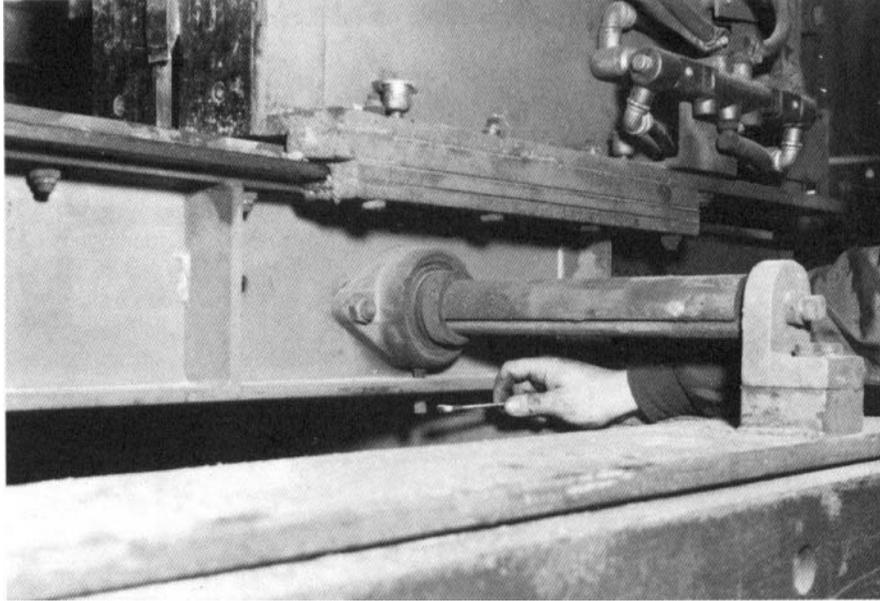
Adjust the set shaft for a proper mesh between the rack and pinion gear by raising the bearing with the set screw on the underneath side, Bolts that hold these bearings in place must be loosened before making the adjustment and retightened after.
